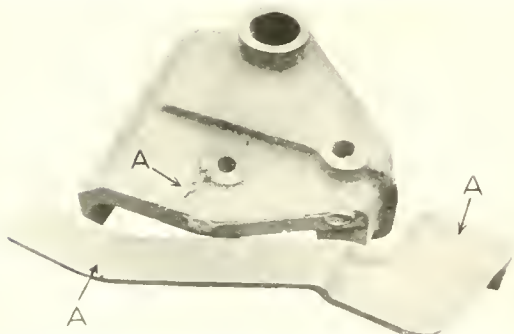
Automobile parts showing slight defects which can be remedied by Arc Welding.
